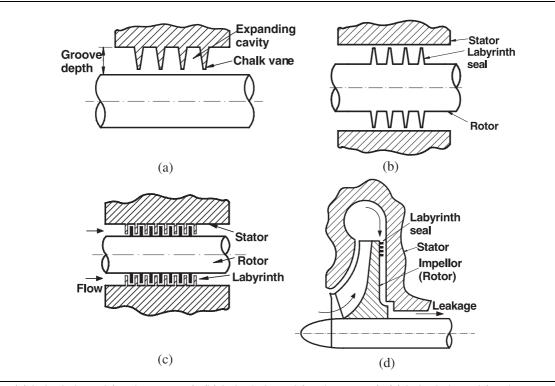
(a) Labyrinth seal (teeth-on-stator). (b) Labyrinth seal (teeth-on-rotor). (c) Labyrinth seal (teeth-on-stator and teeth-on-rotor) axial flow type. (d) Labyrinth seal radial flow type.
